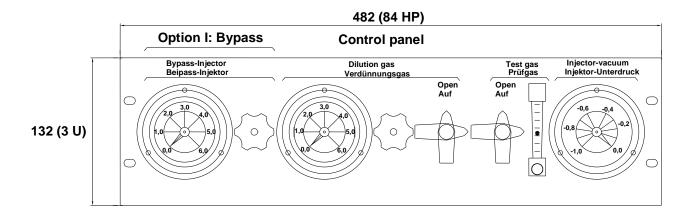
Dimensions (mm) dilution units DIL-1.. and control panel -S or -S1
